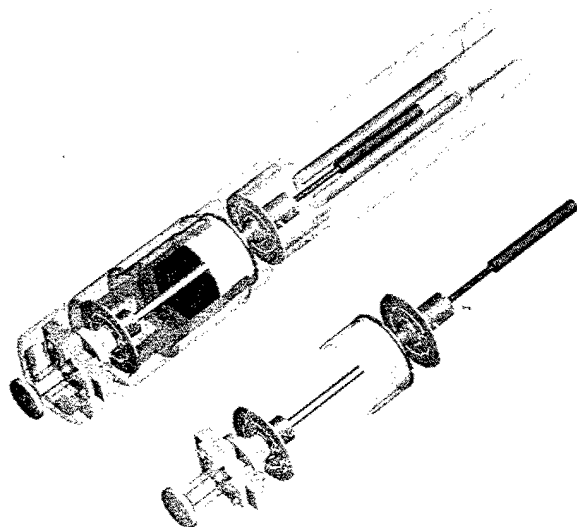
Detail of sensor/actuator assembly. Flexural bearing-mounted moving core (right) consists of force sensor with circular tip, cylindrical voice coil and LVDT position sensor core. Cutaway view (left) shows magnet and pole-piece assembly.
